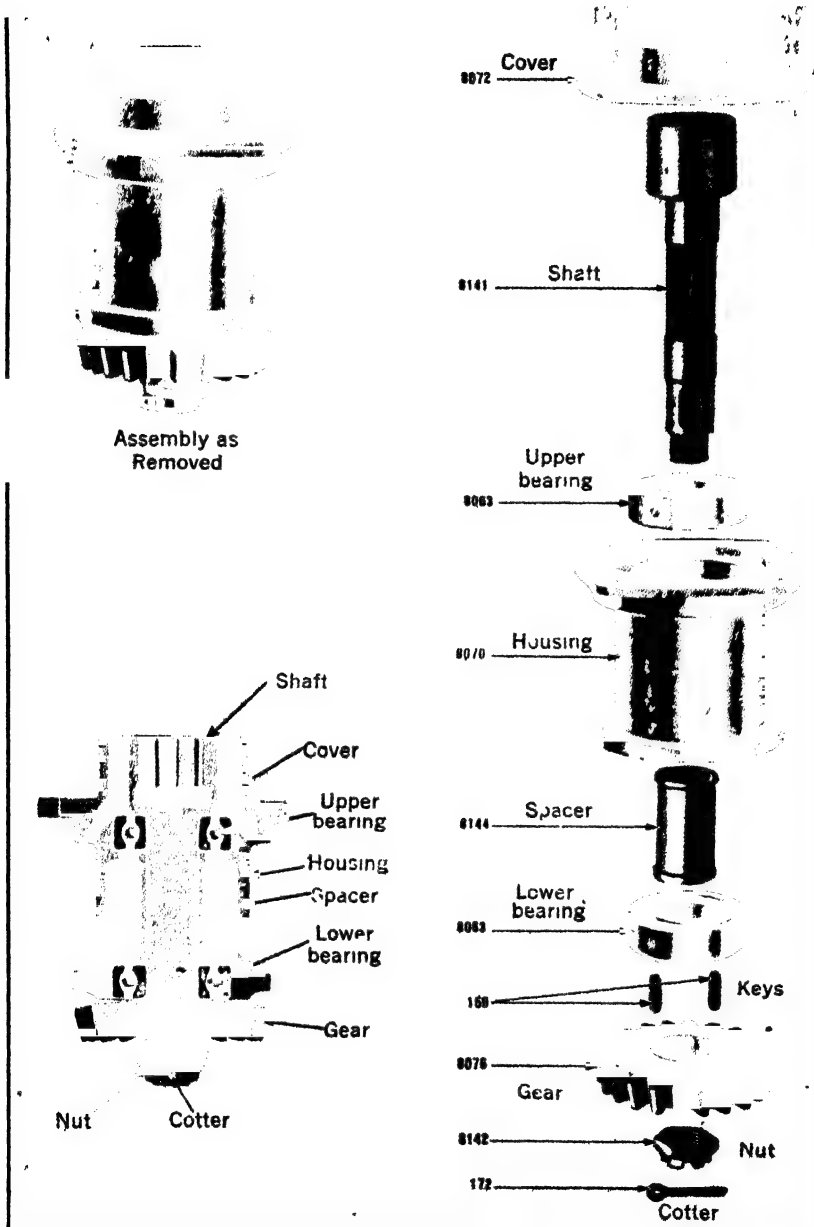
Camshaft Lower Drivegear Assembly of the Liberty Engine and its Parts.
